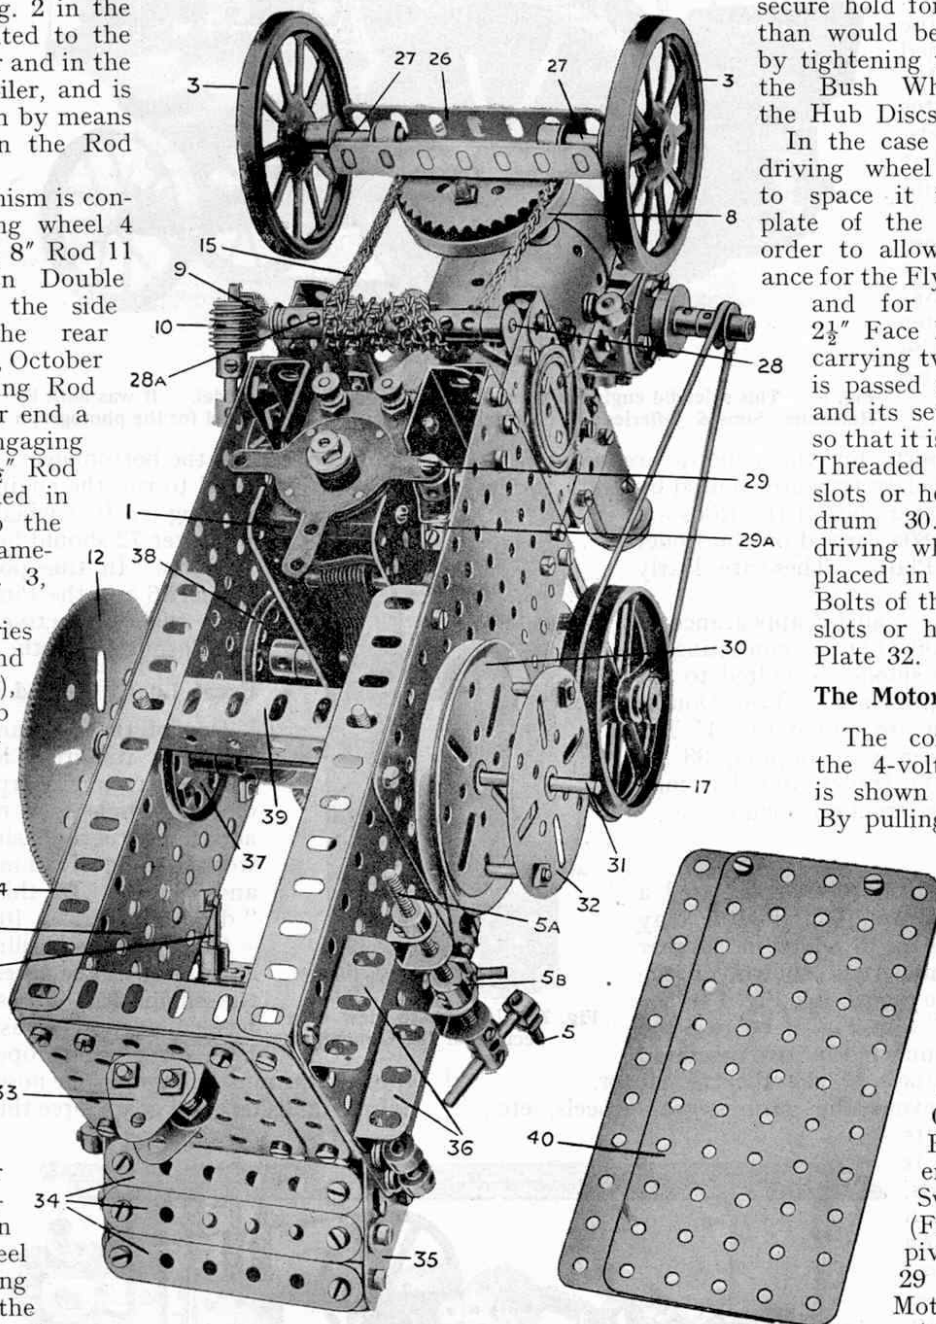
Underneath view, showing Steering Gear and Electric Motor, etc.
